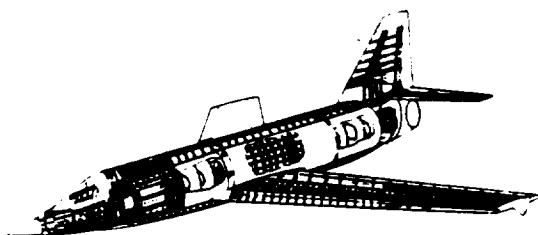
X-2, K Monel internal structure and stainless steel skin. Mach 3.2, 1956, (ref. 4).
